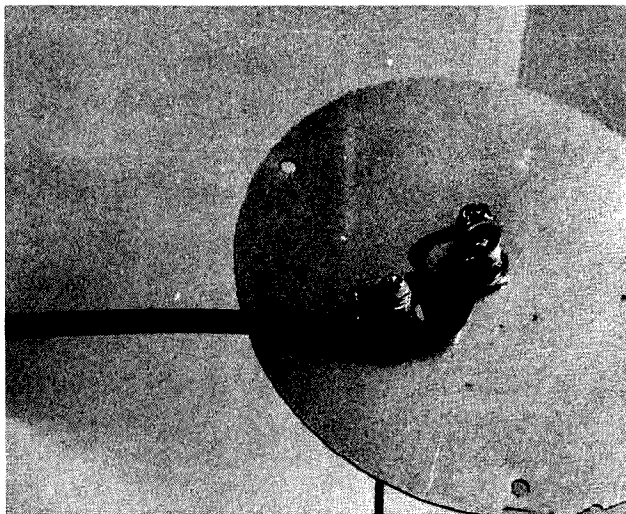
Photo E. Mounting the BNC connector to a spare belly inspection plate. Note that the cable is securely clamped.
